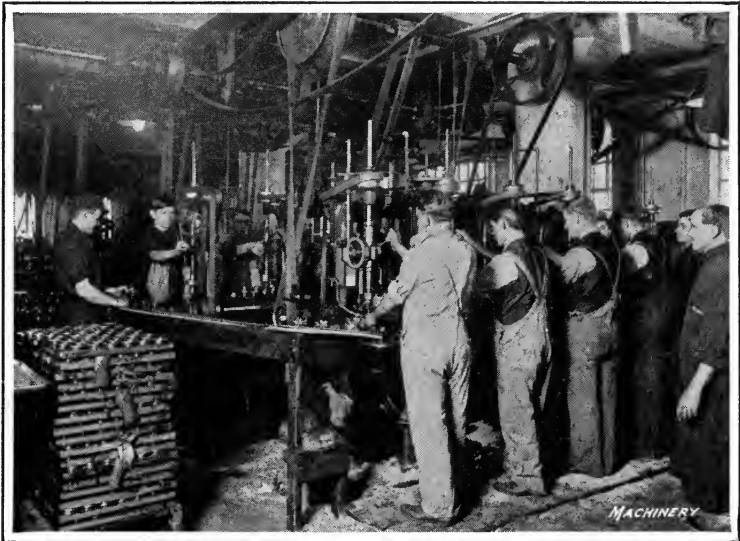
Battery of Two Four-spindle Drilling Machines operated by "Team" of Ten Men for Drilling and Tapping Holes in Fuse Parts
